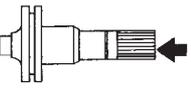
Main Shaft Spigot Bearings [www.fordson-dexta.de](http://www.fordson-dexta.de) Fig. 33 Main Drive Shaft and Bearing Assy. (Super Dextra)
